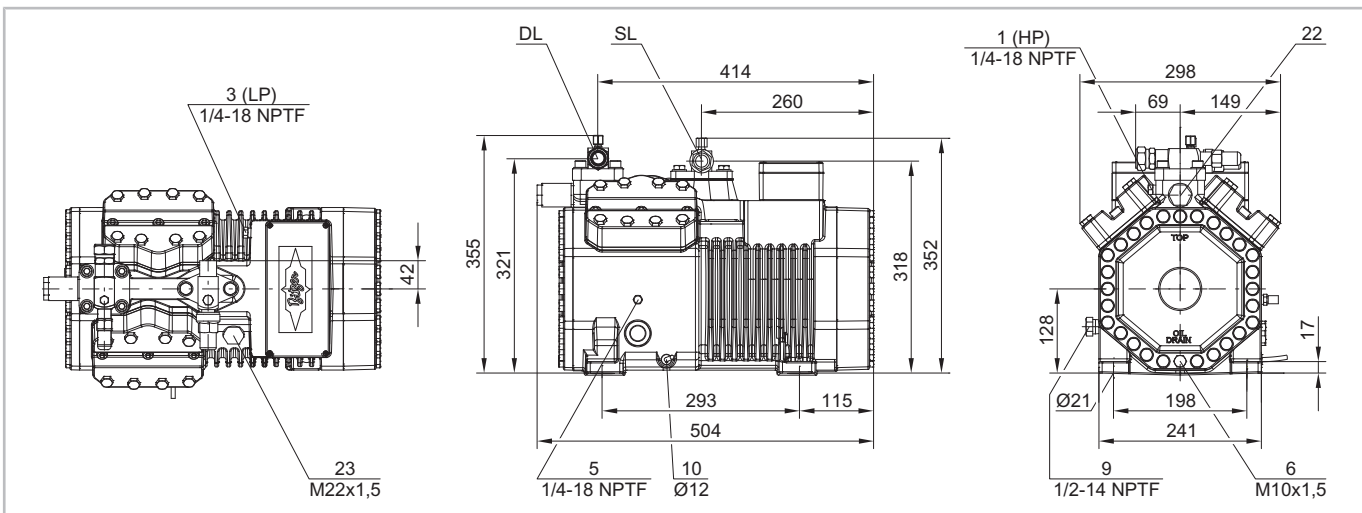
Dimensional drawing 4PTC-6K .. 4KTC-10K
